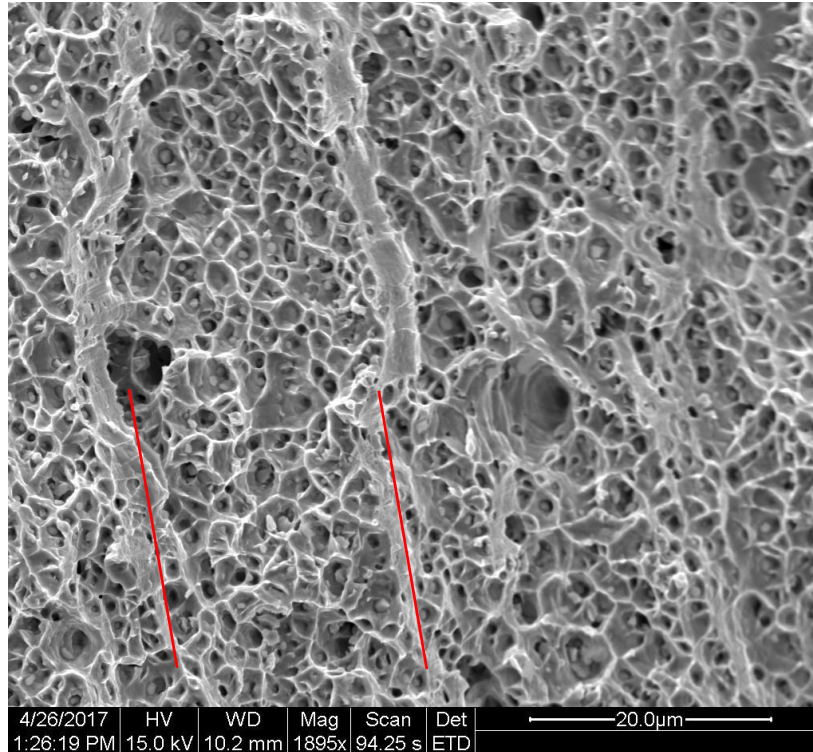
Fracture surface of the P60-X12 horizontally-built sample showing interfaces between deposited layers indicated by the red parallel lines.
